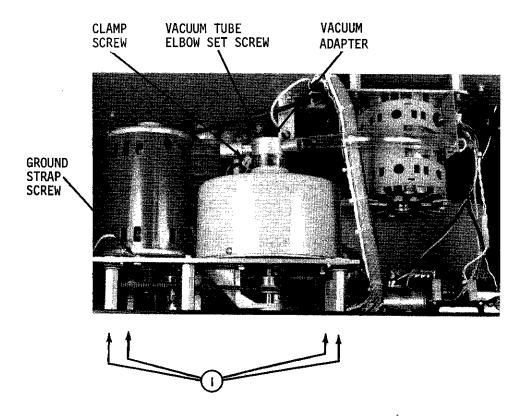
Removal of Vacuum Pump Motor Assembly
